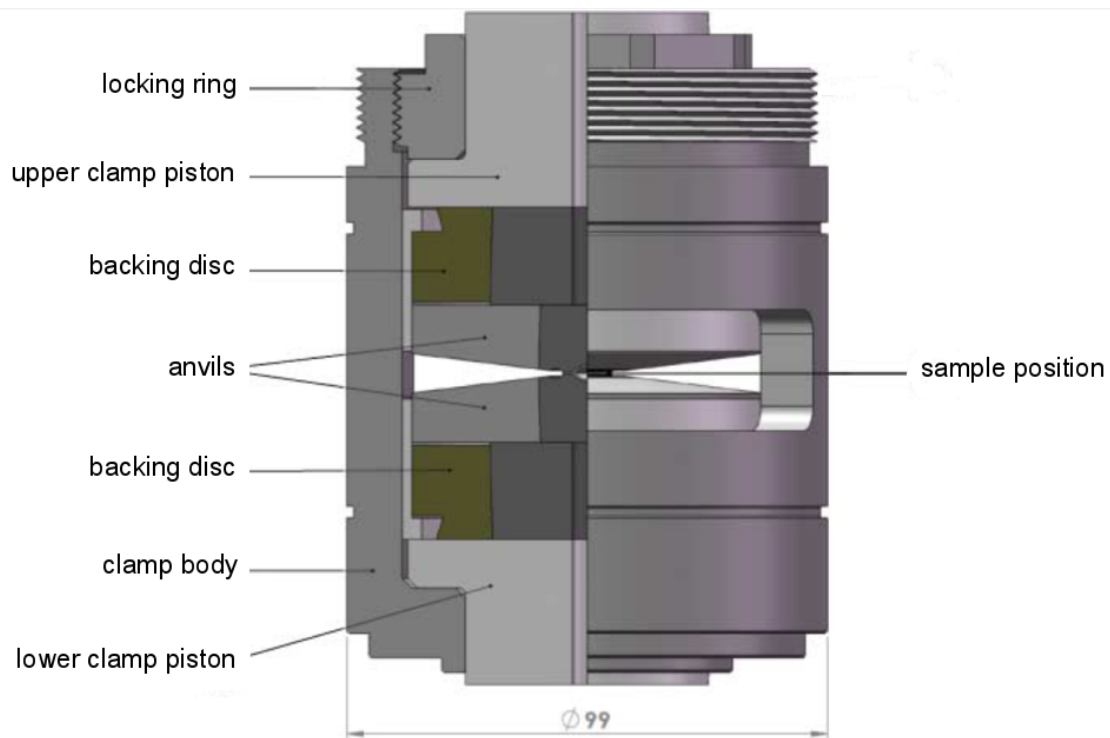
Loading clamp for Paris-Edinburgh presses with cross-section on the left half to illustrate interior, adapted from ref [27]. The clamp we used is a scaled-down version with 80 mm diameter.
